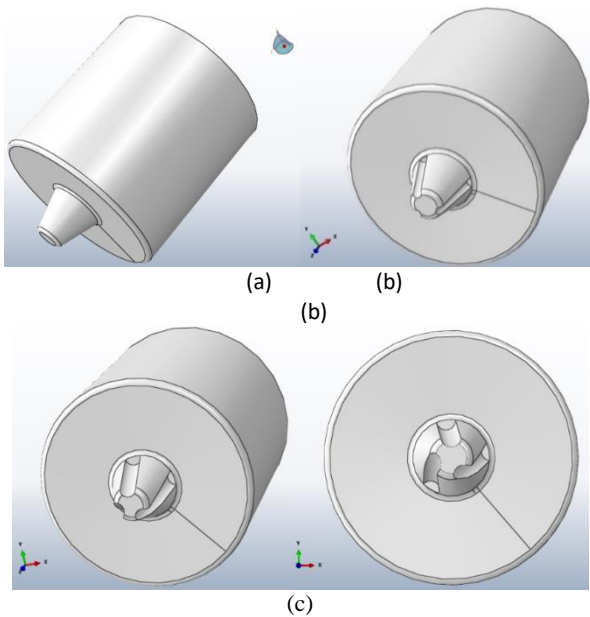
FSW tool pin profiles; a (Smooth pin) b (Grooved pin), c (Spiral-Grooved pin)
